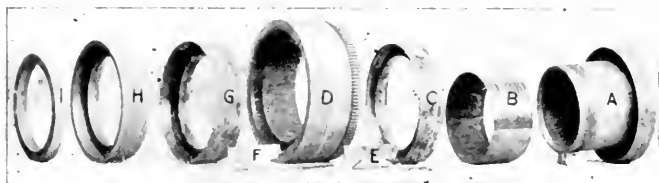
DETAILS OF COMMUTATOR PARTS.
